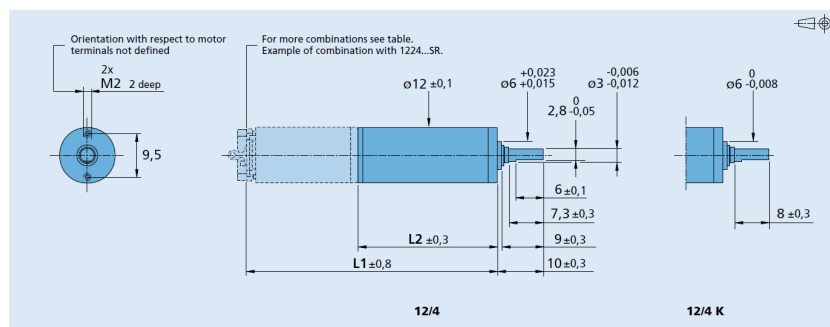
Dimensional drawing of the 12/4 gearbox taken from the Faulhaber datasheet.
